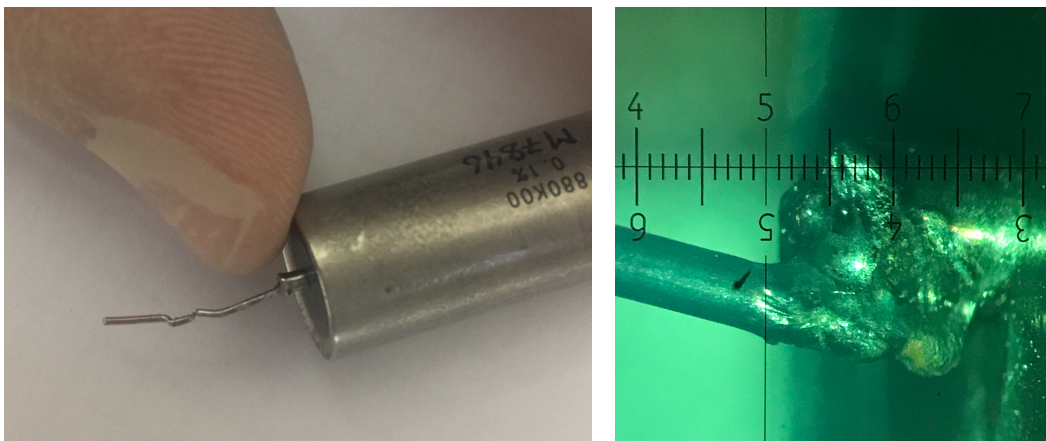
Left: Picture of a dismantled resistor. The connection wire, which was fixed with a headless screw in the connecting T-element, shows a high grade of deformation. Right: Microscopic picture of laser-welded extension for a resistor with a cut connection wire.
